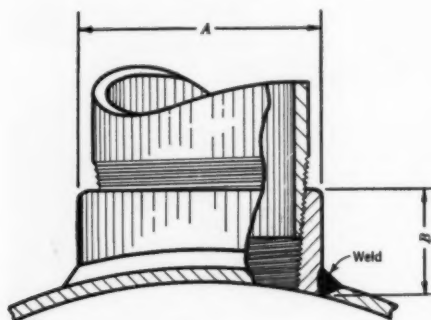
Extra-heavy Half-Coupling Welded to Pipe as Threaded Outlet
